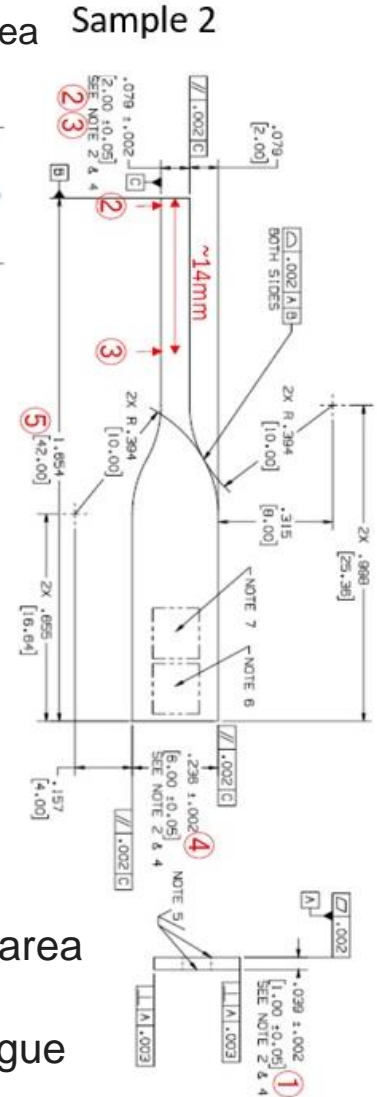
Sketch of the mini fatigue test specimen (all dimensions are in millimetres) [3]
